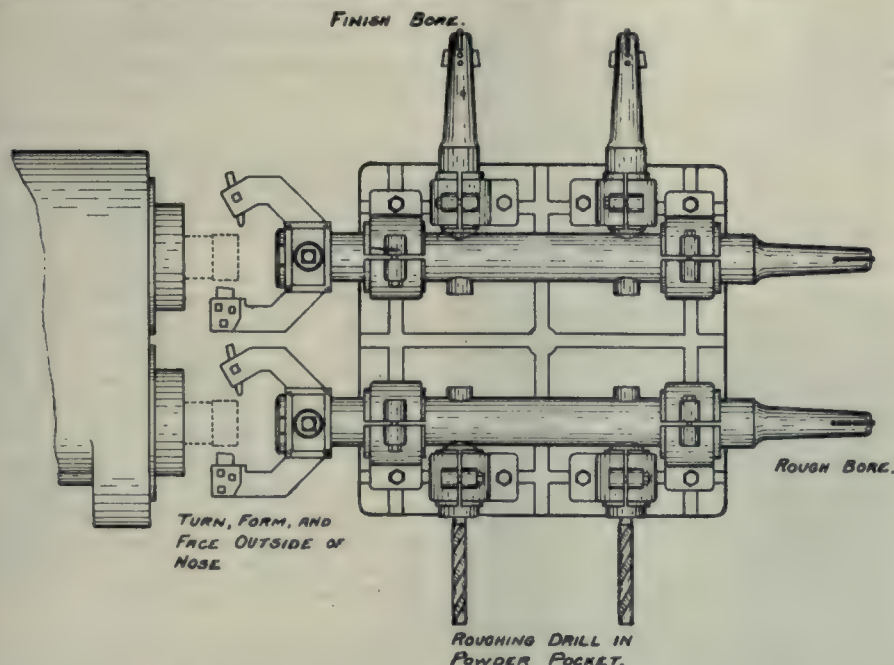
TOOLING OF DOUBLE SPINDLE FLAT TURRET LATHE.
